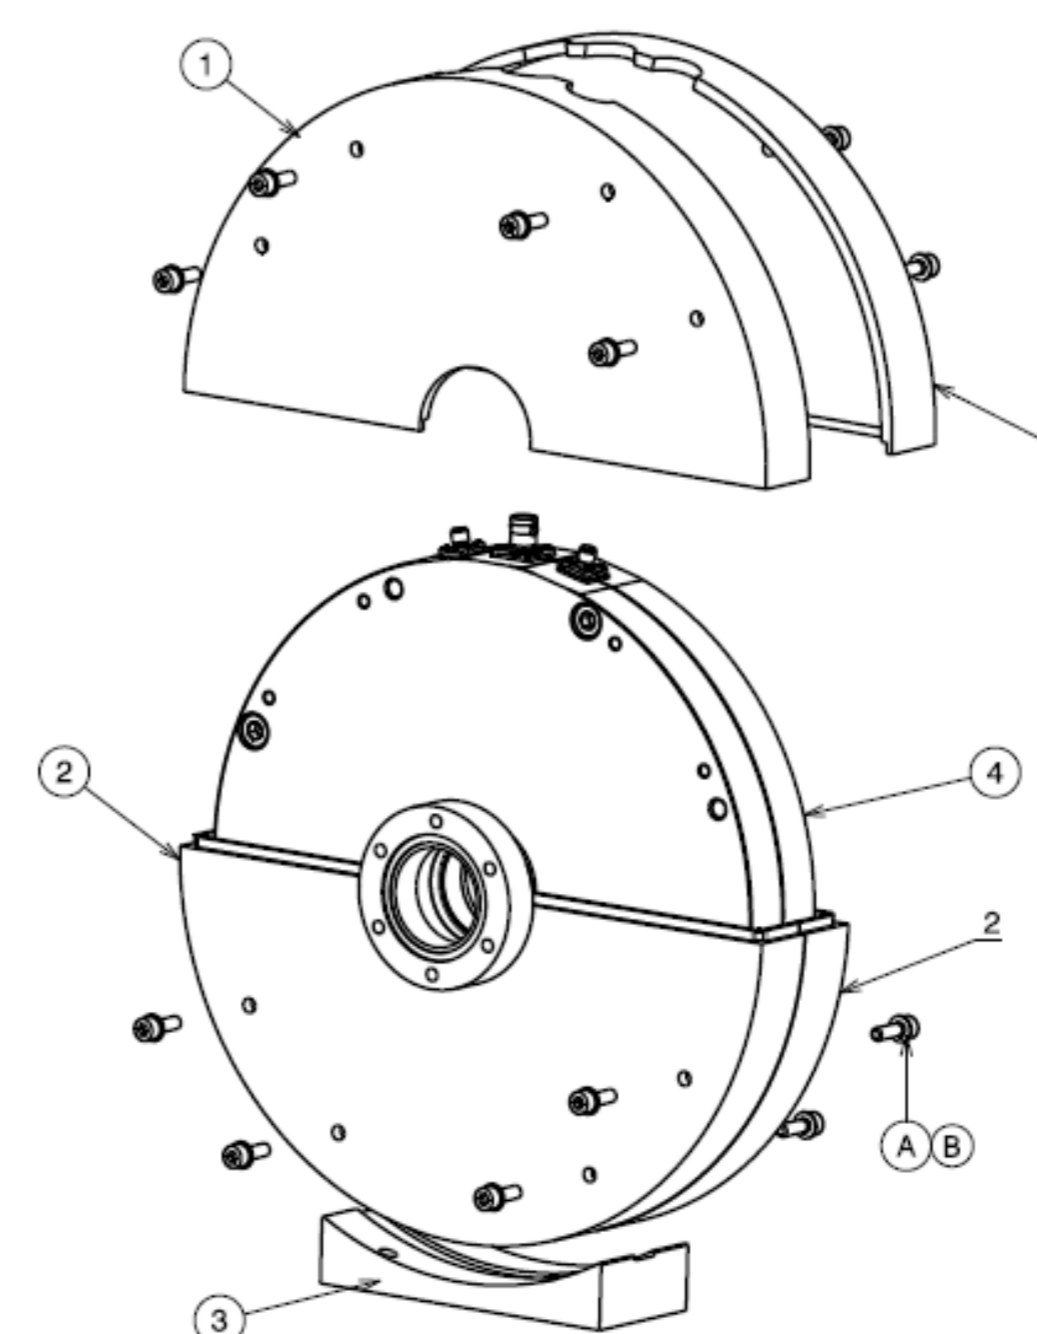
COMBO layer and installation with Quadrupole for magnetic shielding checks.
